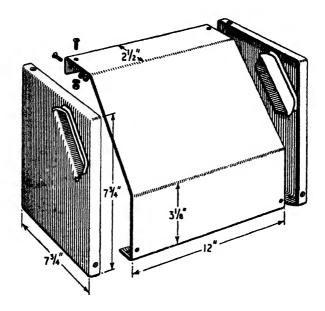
Sketch showing construction (with leading dimensions) of the B.B.C. standardized chassis. The sloping panel is supported at the sides by two flanges bent in from the cut-away slots that form the hand grips
